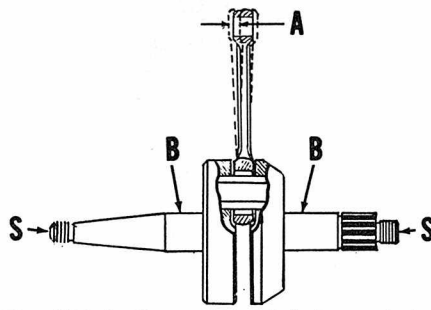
Support crankshaft on lathe centers at point (S) and use dial indicators at point (B) to measure crankshaft runout.
